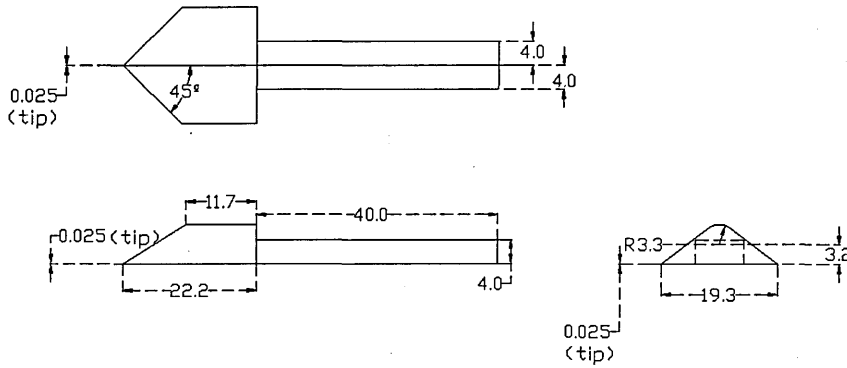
Dimensions of slender protuberance (all dimensions in millimetres)
